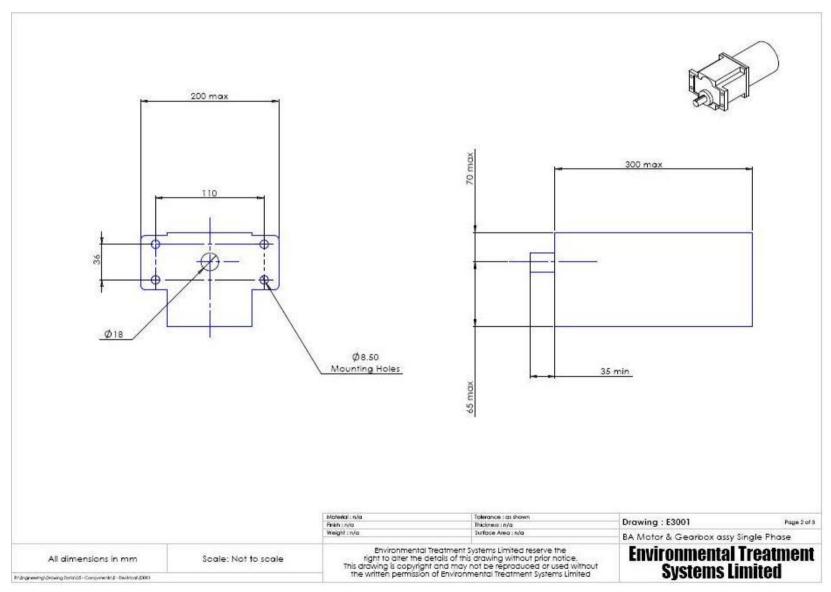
BA Motor & Gearbox assy Single Phase Environmental Treatment
